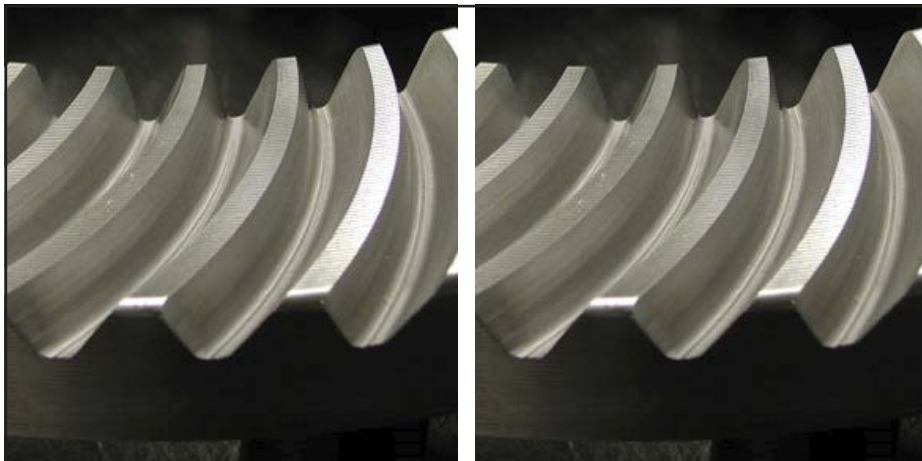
Ring gear root fillet — left → face milling; right → face hobbing.
